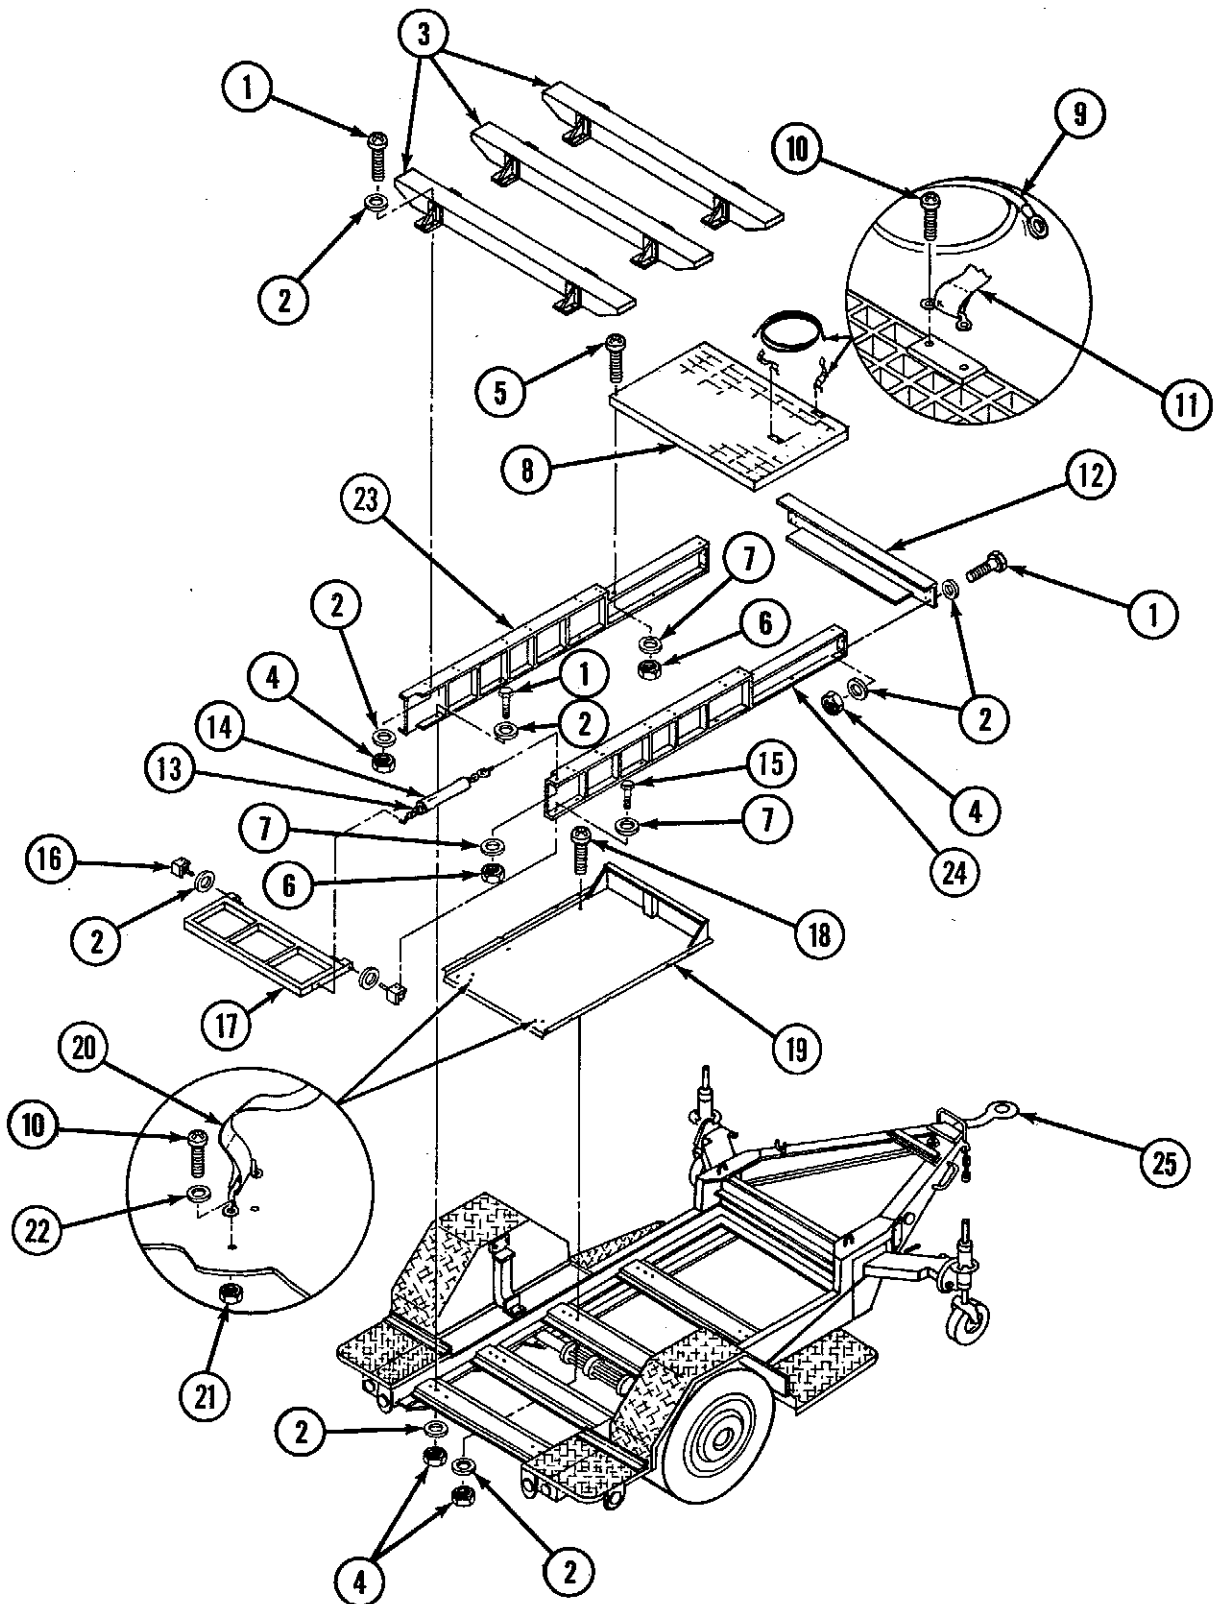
Trailer Assembly (Sheet 1 of 3)
